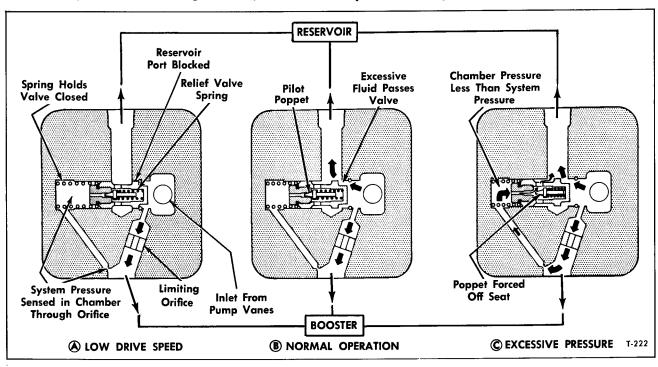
Hydraulic Pump Flow Control and Relief Valve Operation
